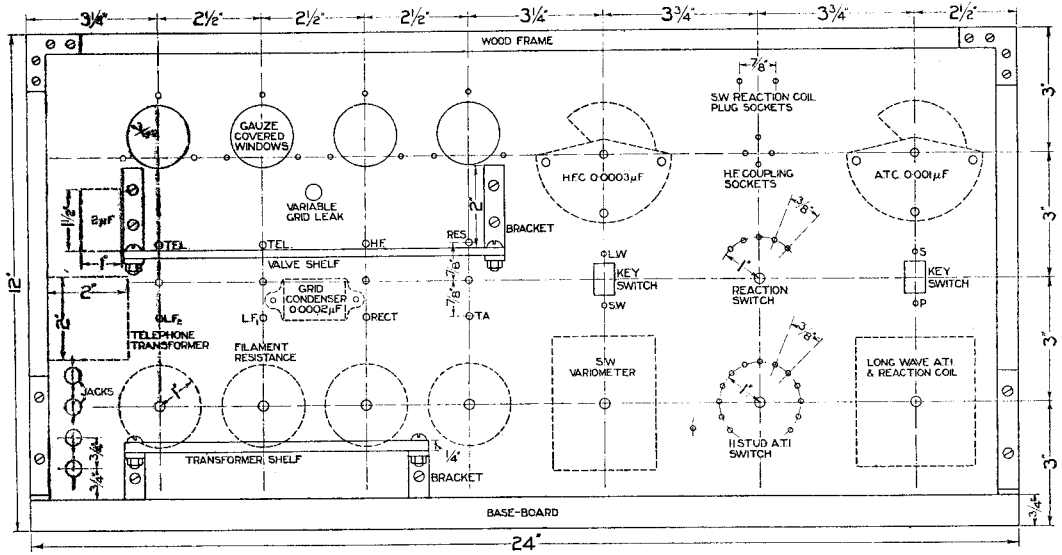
Dimensional drawing of the panel showing drilling and layout of components.
